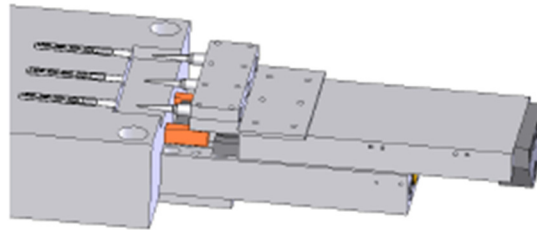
Core pulling cylinder (DS, Standard Components, 2008)
